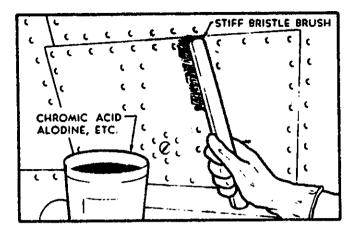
Cleaning and Inhibiting Corroded Aluminum Surfaces.
